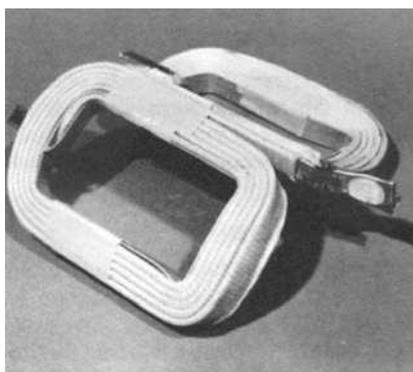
Portion of ultrasonically welded field coil assembly
